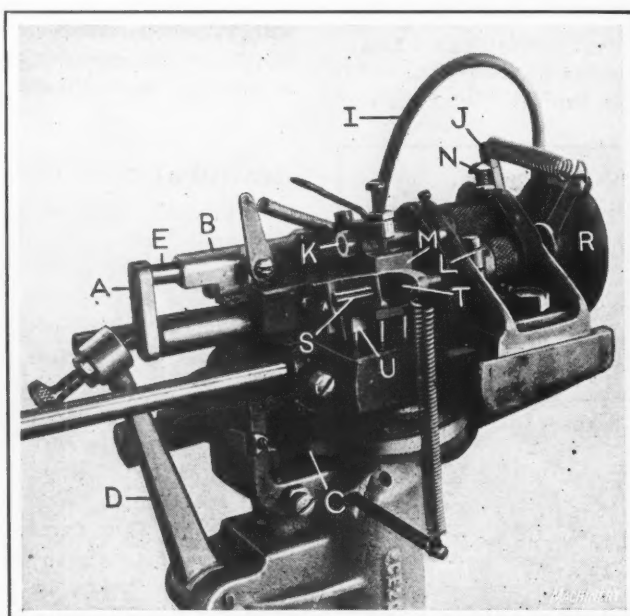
Side View of Head for forming the Pigtail in Filament Anchor Wires.
